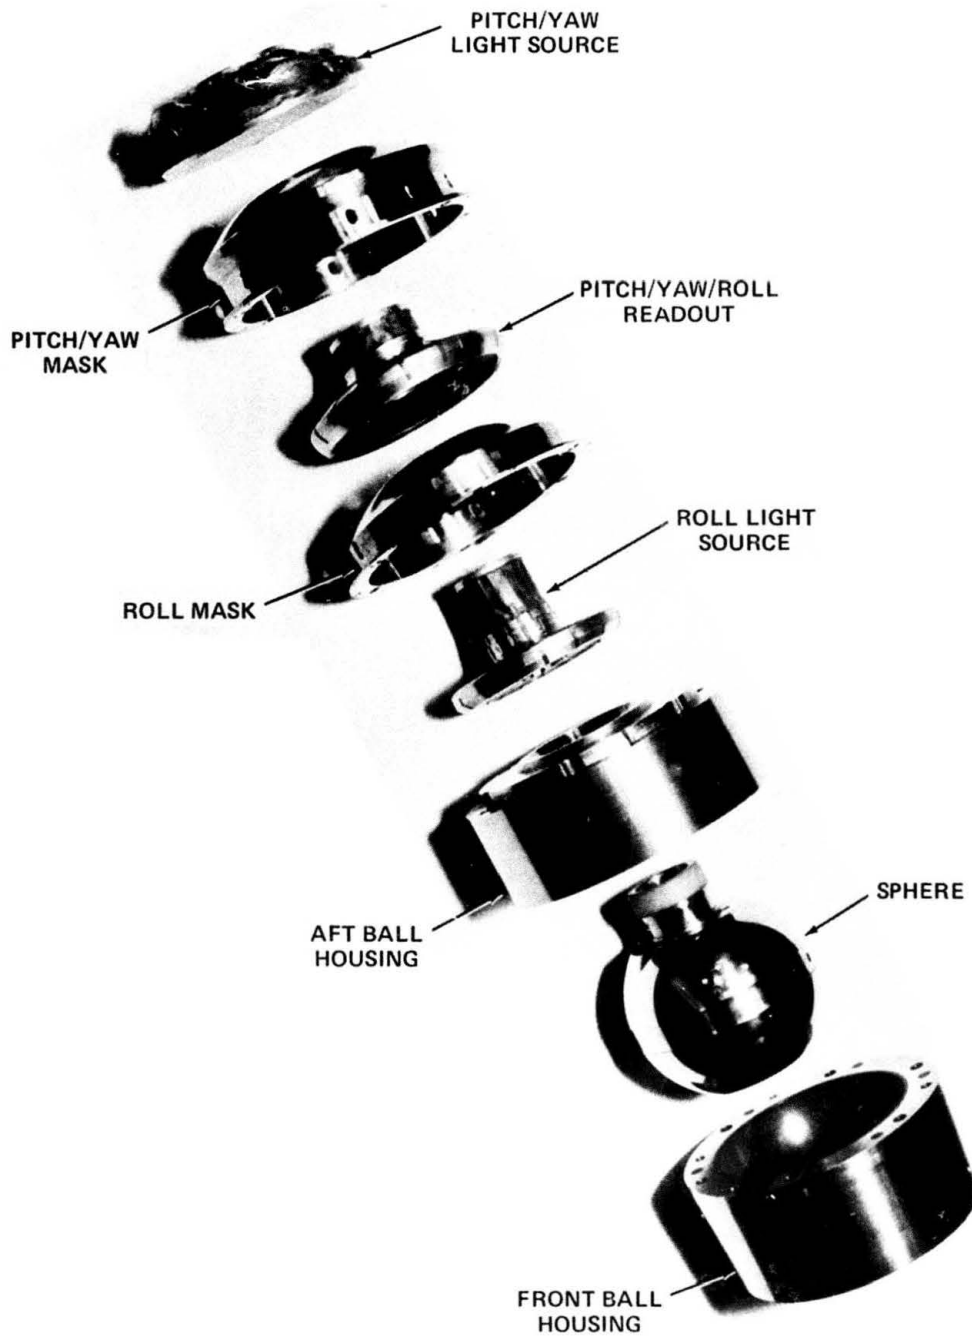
GAS BEARING ASSEMBLY/READOUT COMPONENTS.
